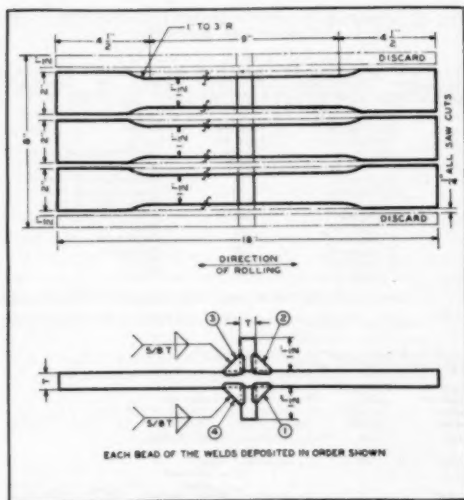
DETAILS OF STANDARD DOUBLE-FILLET-WELDED TENSILE SPECIMENS
